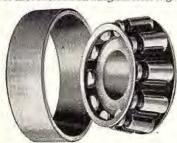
Timken tapered-cone type of roller bearing. Used for wheel bearings, axle bearings, and different parts of the car. The part to the left is called the cup or outer race in which the rollers revolve. Note that the cone, or inner race, is the part underneath the rollers. This part fits onto the shaft and the cup fits into the bearing space.
